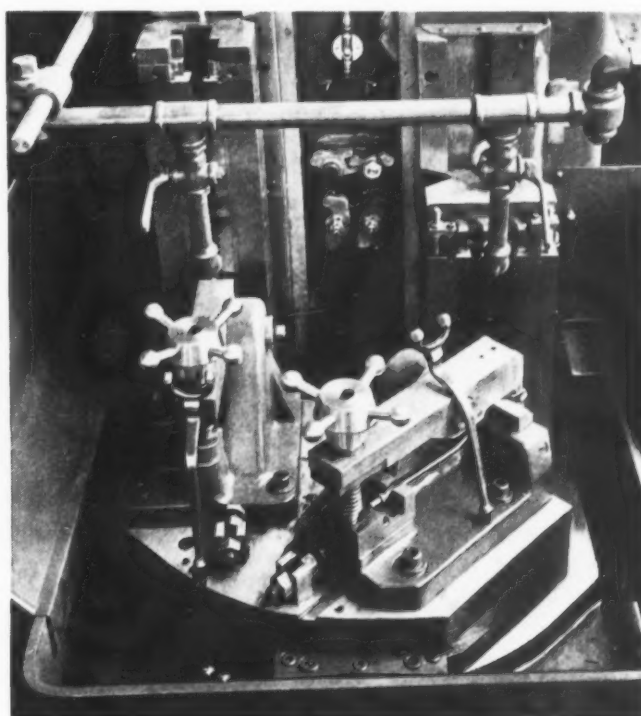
Equipment for Broaching Transmission Shifter Fork Levers on Duplex Broaching Machine
